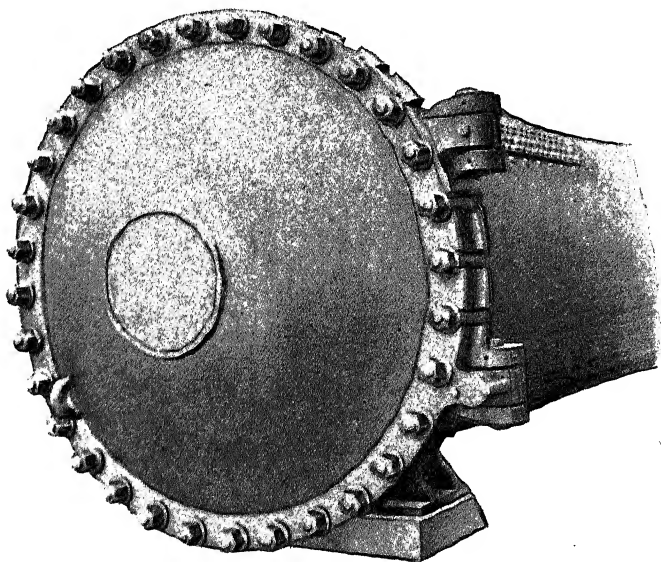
Perspective view showing arrangement of cylinder door, door frame, etc.
